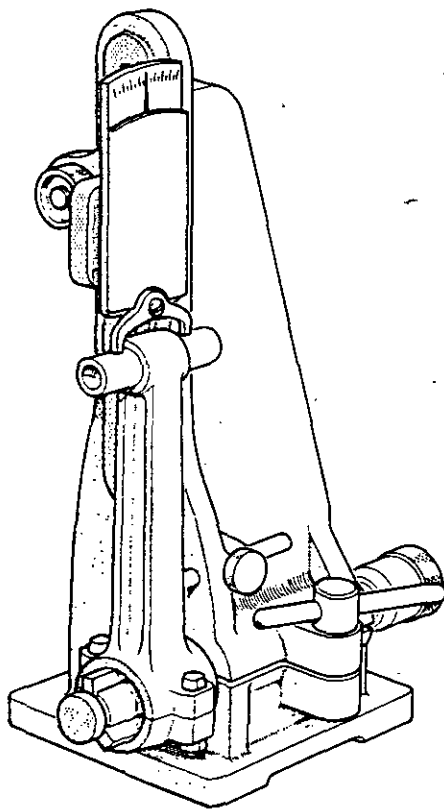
CONNECTING ROD ALIGNMENT GAUGE
